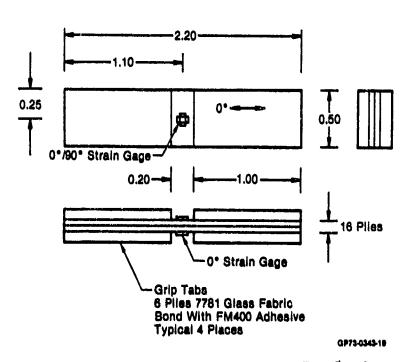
Unidirectional 0° Compression Coupon Test Specimen
